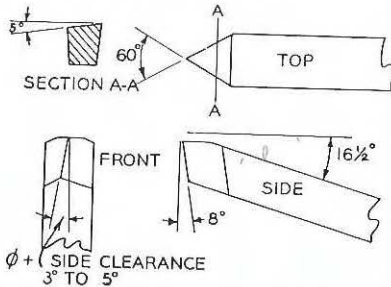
Tool for cutting 60° type threads. Fig. 40 explains how angle ϕ must be determined.
